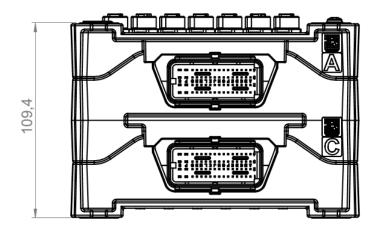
Dimensions of the digsy®fusion housing – MEDIUM – side view
